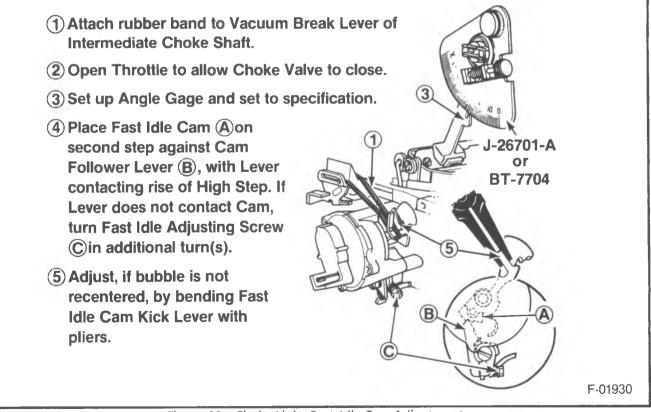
Choke Link - Fast Idle Cam Adjustment
